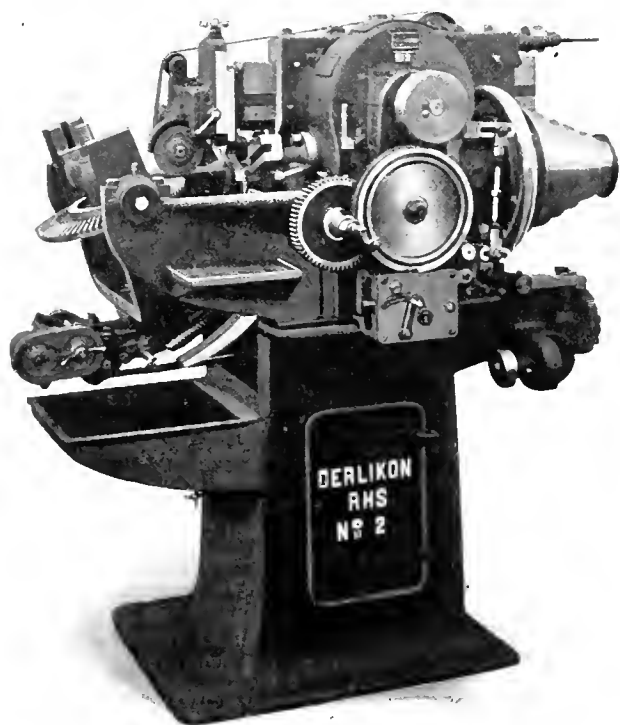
The Oerlikon Templet Gear Shaper of Fig. 154, arranged with Grinding Wheel for Finishing Hardened Bevel Gears.
